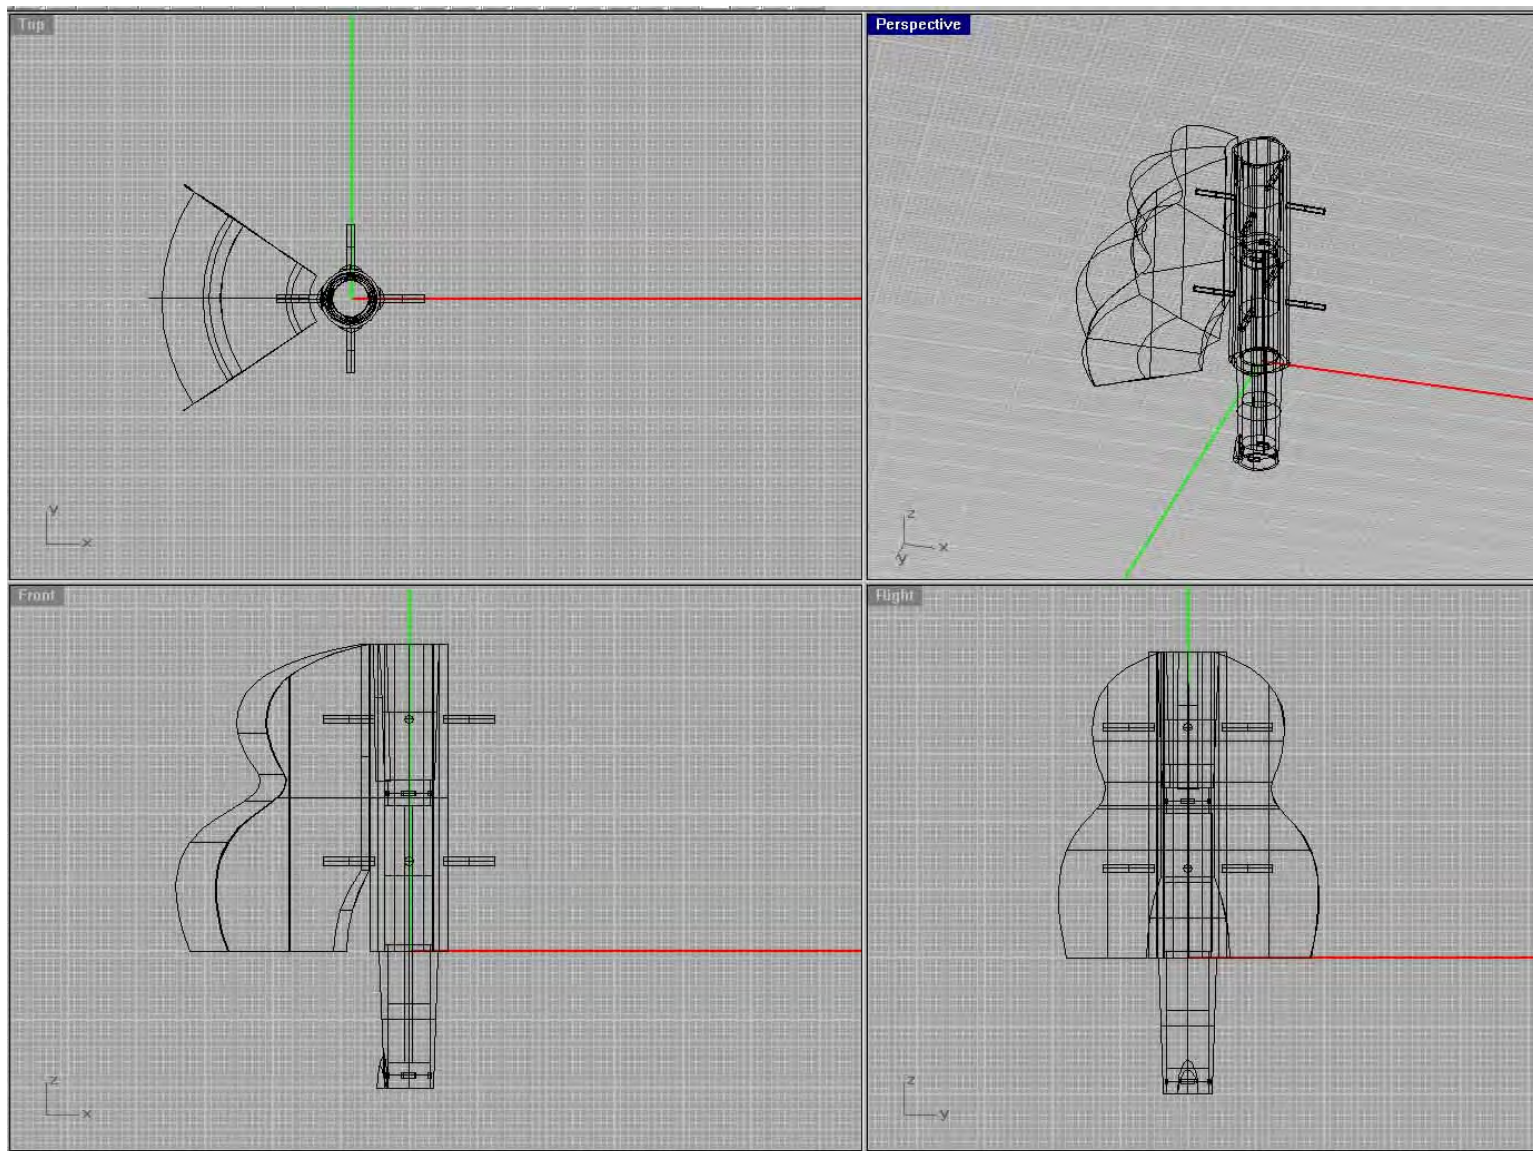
CAD file of final Chunk design, with foam wing and connector core.
